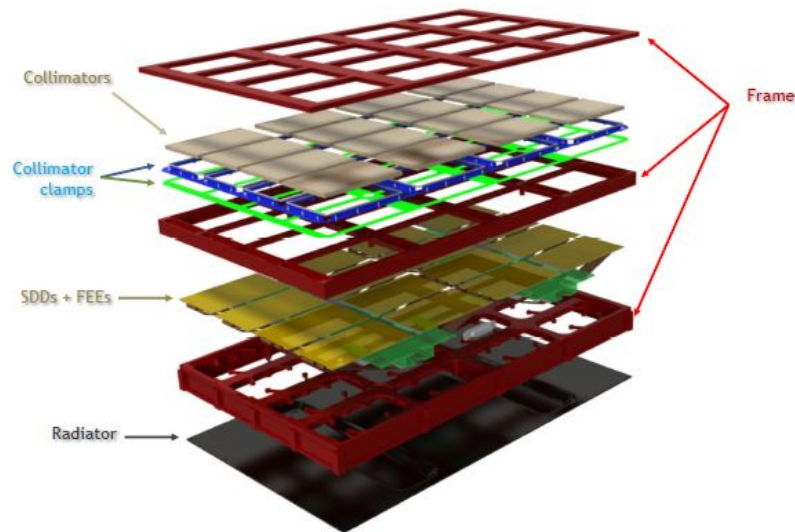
Exploded view of the LAD modules' assembly. Each module consists of a 300 μ m thick lead back shield (not shown), a 2 mm thick aluminum radiator, a detector and a collimator tray, holding 16 large area SDDs and FEEs, and 16 capillary plate collimators, respectively. Source: Zhang et al. (2018).
